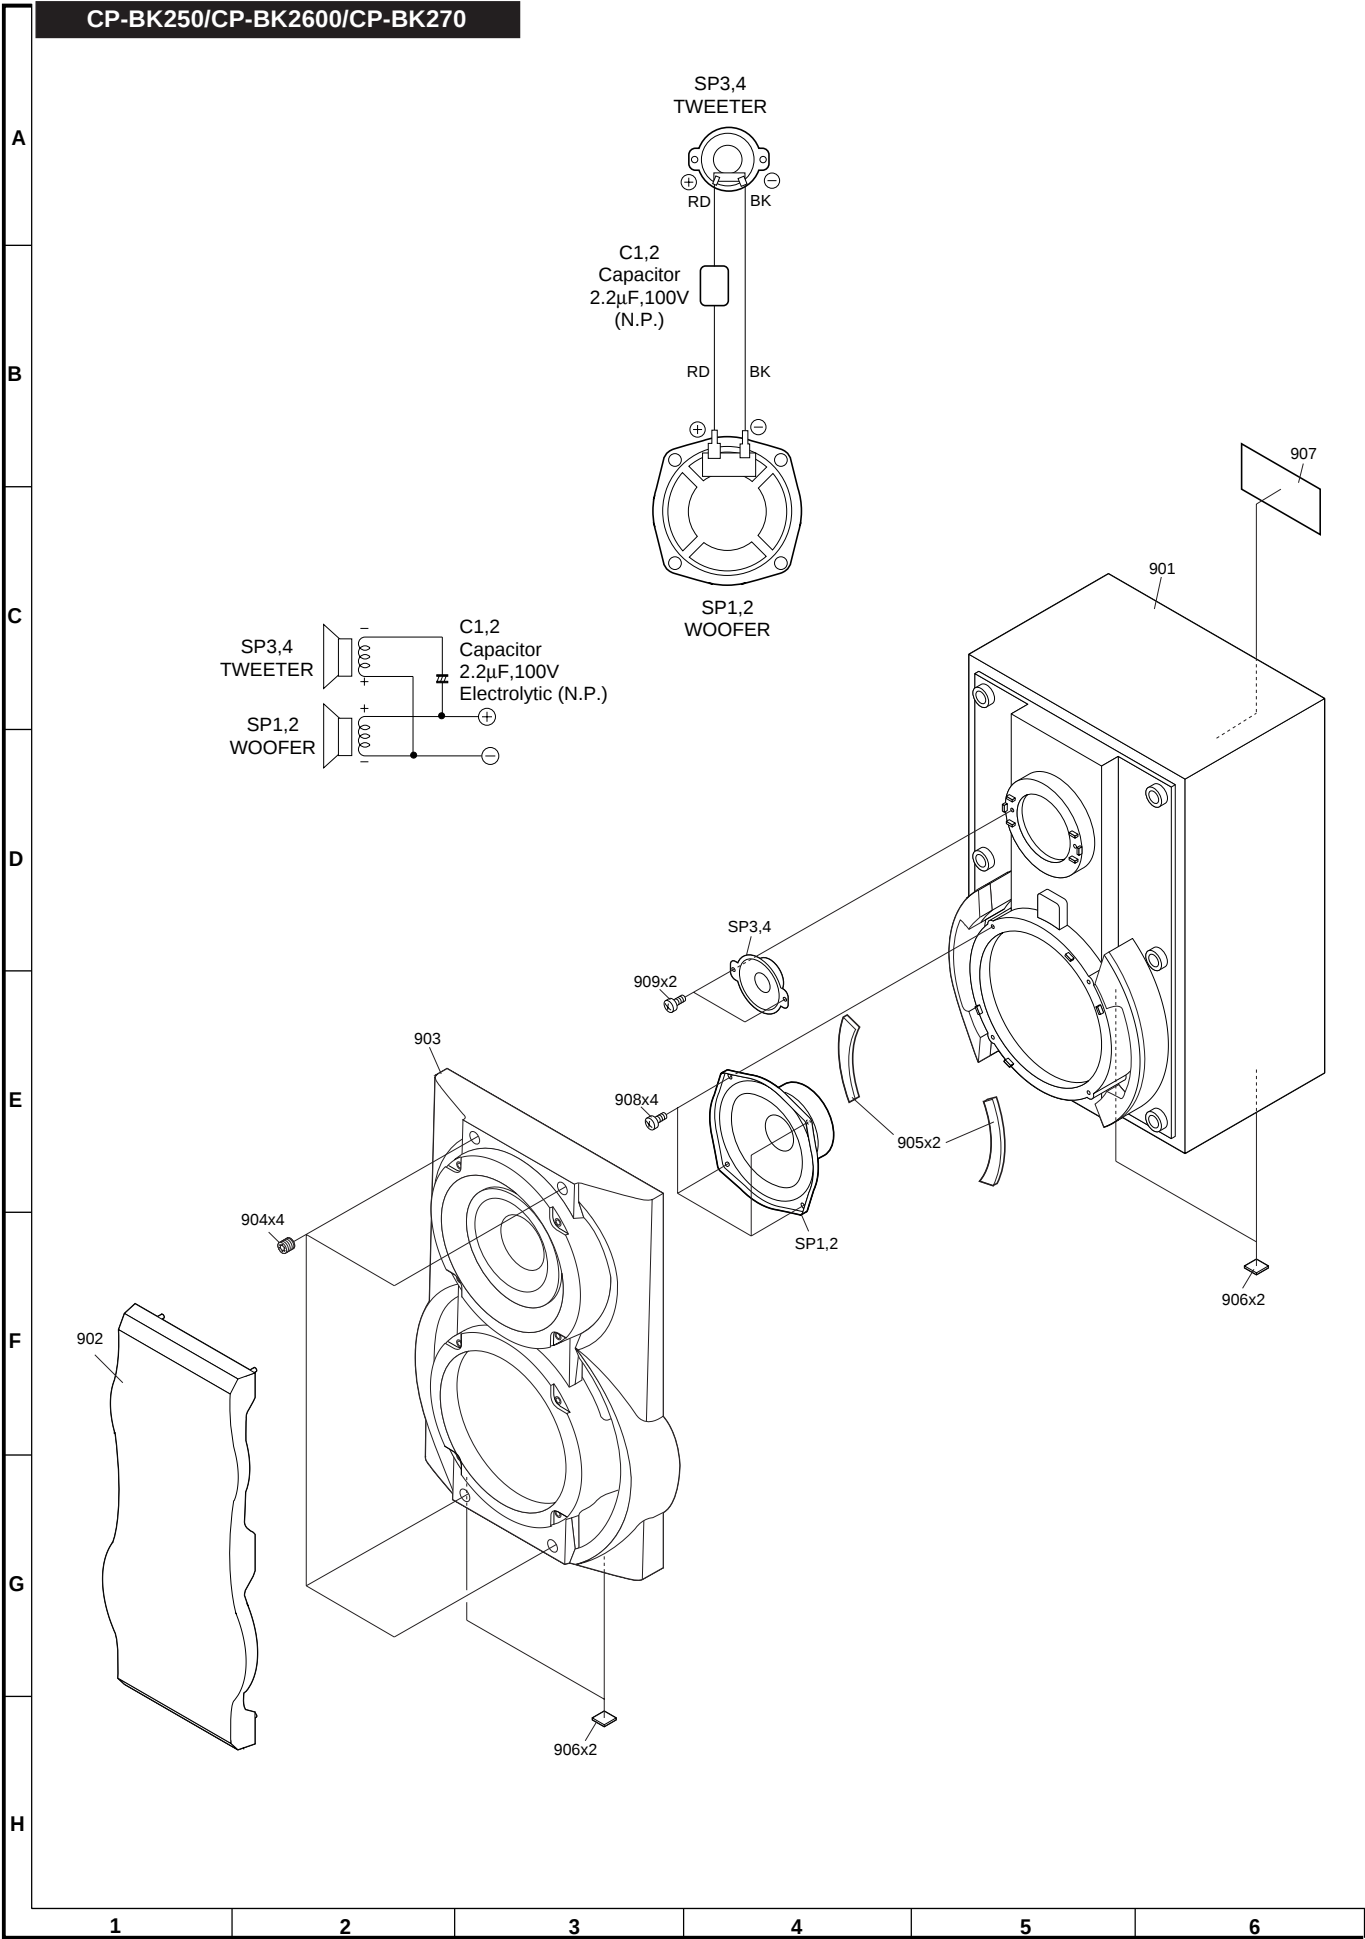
SPEAKER EXPLODED VIEW (1/2)
